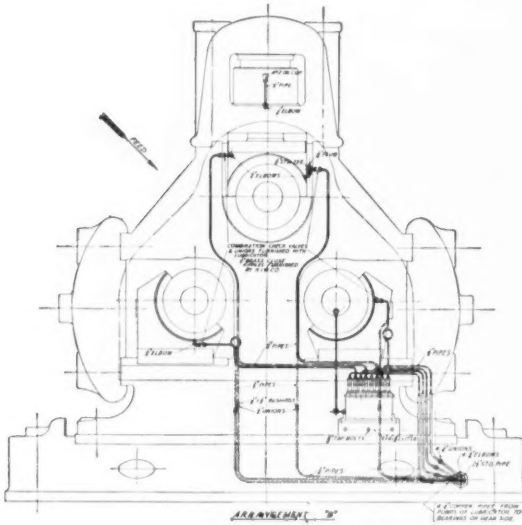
An assembly of sugar mill gears with provision for individual lubrication of bearings.
